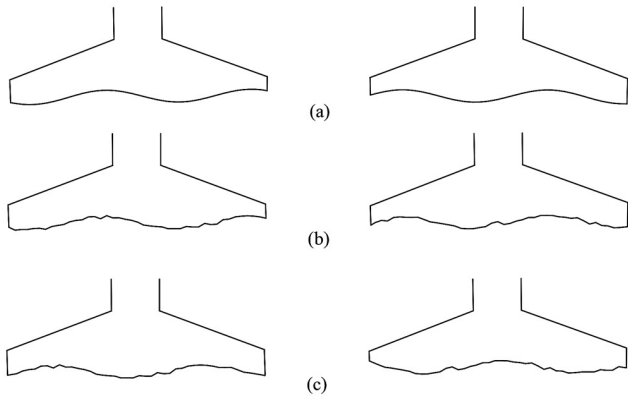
Manufacturing tolerances of the tooth tips shapes with the non-UUM: (a) reference design, (b) design with shape tolerances, (c) design with shape and phase shift tolerances.
